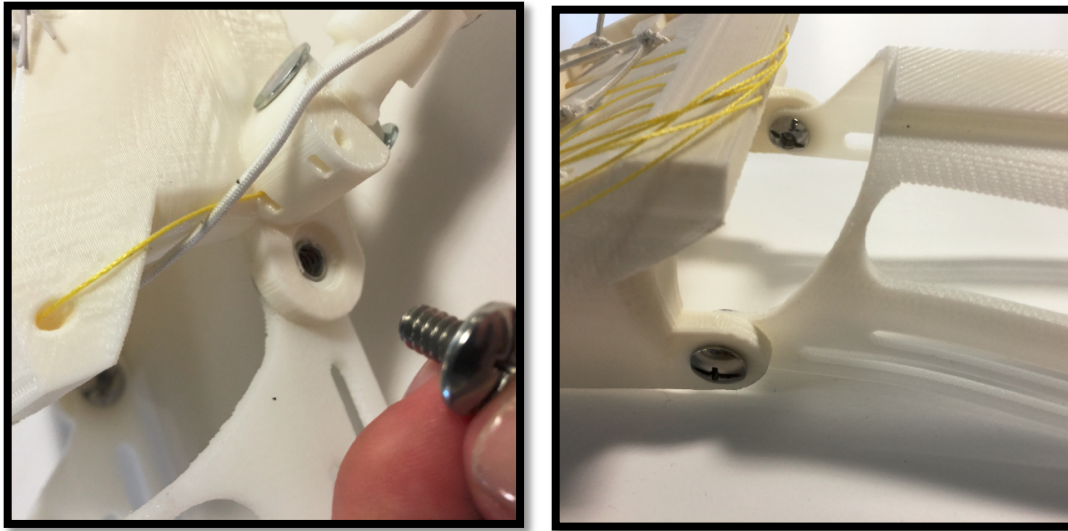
Attaching the palm to the forearm subsystem with Chicago screws.
